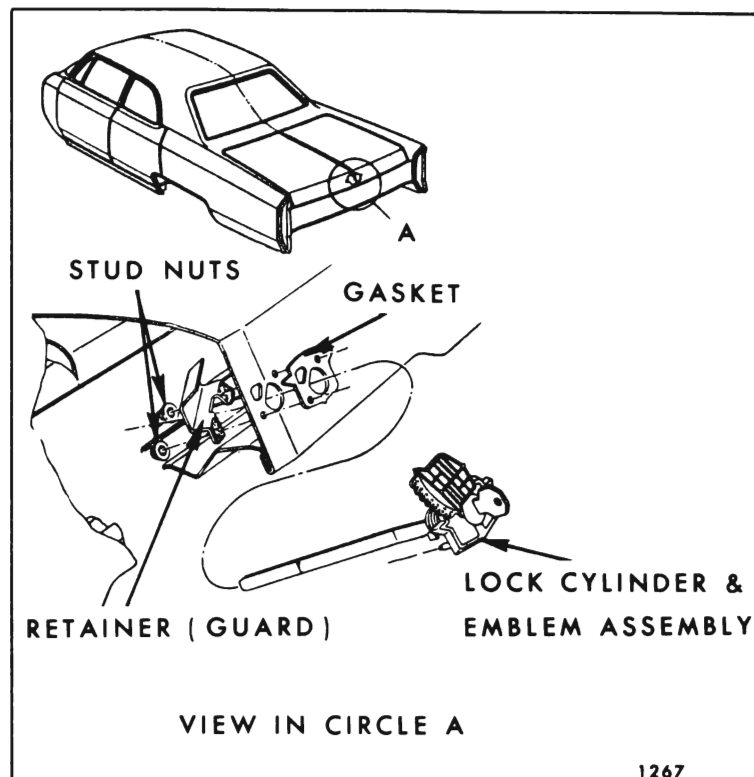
Rear Compartment Lid Lock Cylinder and Emblem Assembly
